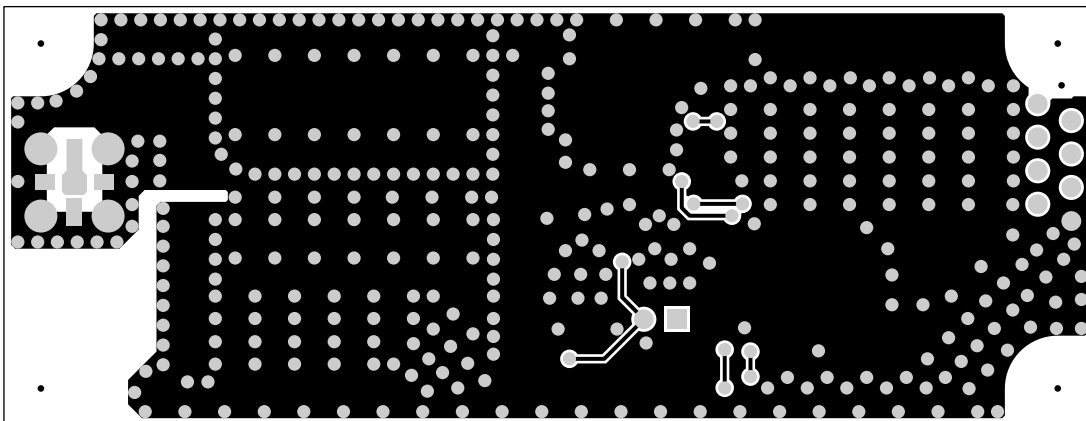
Reference layout: Bottom layer on 2-layer 1.6 mm FR-4 material
